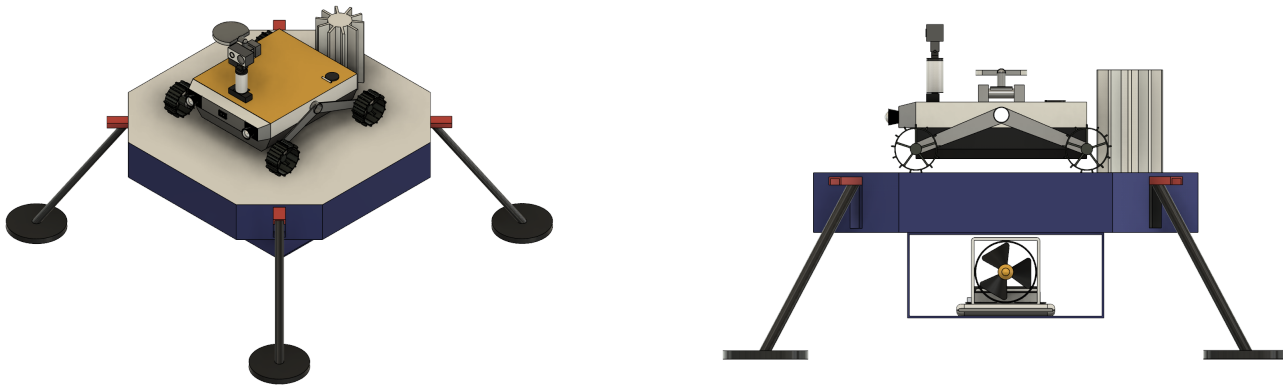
Orthogonal and Side view of final lander assembly with the hovercraft boats
